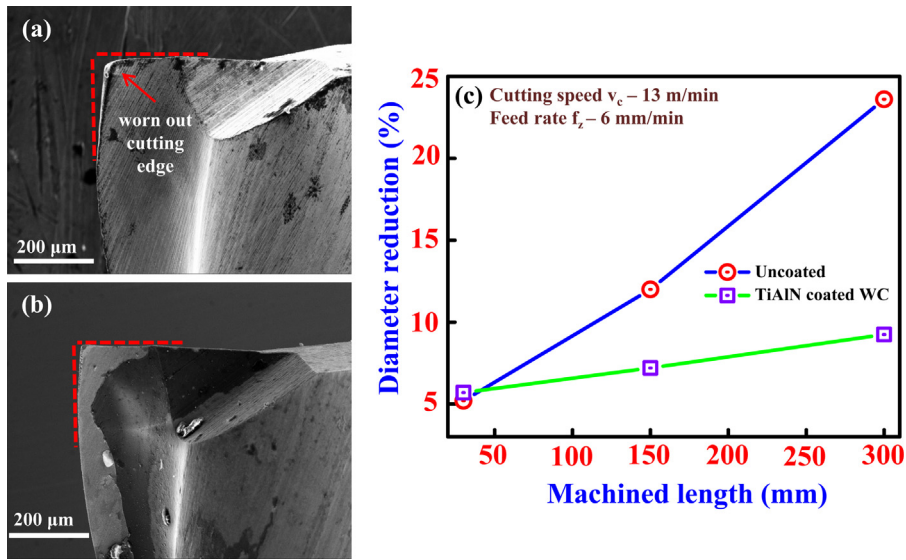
FESEM image of used (a) uncoated micro-end mill and (b) TiAlN coated micro-end mill, (c) variation in tool diameter with machined length for both uncoated and TiAlN coated micro-end mill.
